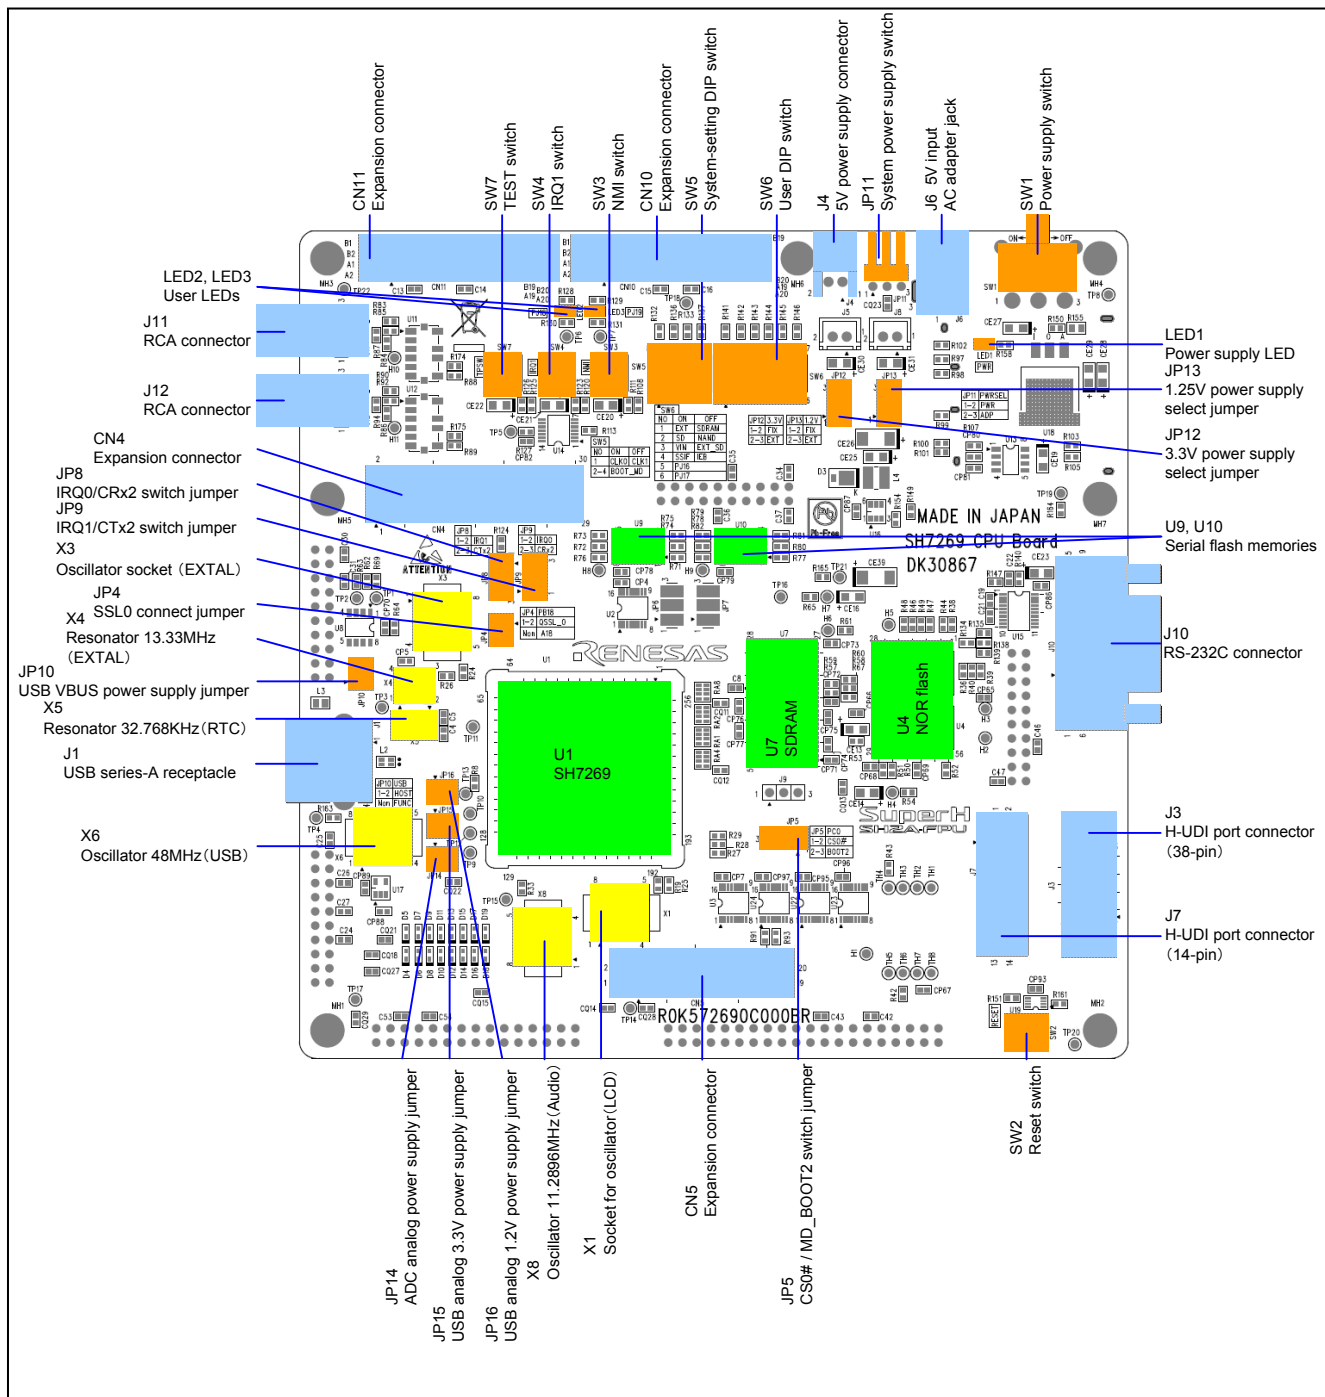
SH7269 CPU Board Layout and Component Placement (Top View of the Component Side)
